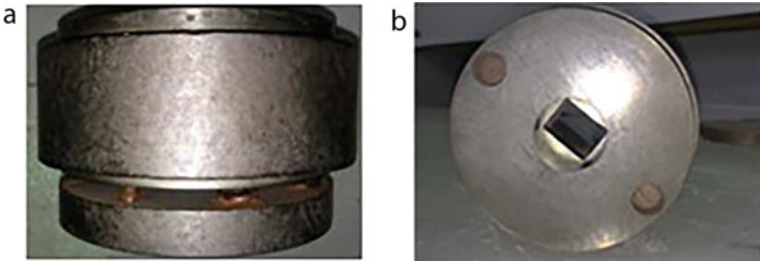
a Side view talcum powder compression mold; b Top view
